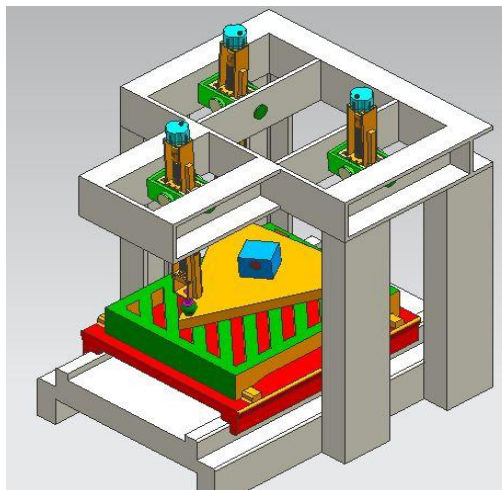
Schematic diagram of parallel friction stir welding robot
